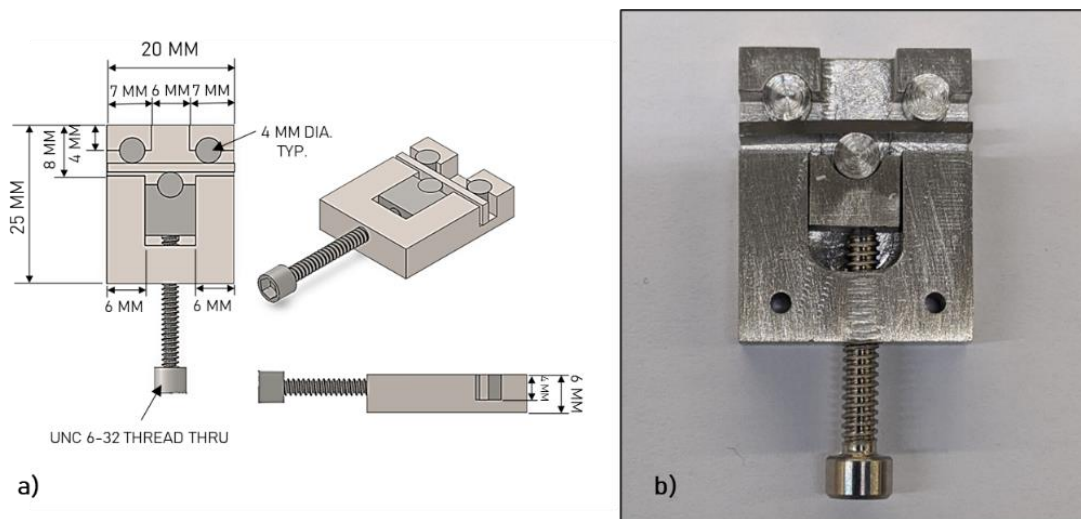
a) Schematic of three-point bending apparatus base used for mounting Hastelloy N sample under stress. b) Final configuration of sample mounted and tensioned in three-point bending device.
